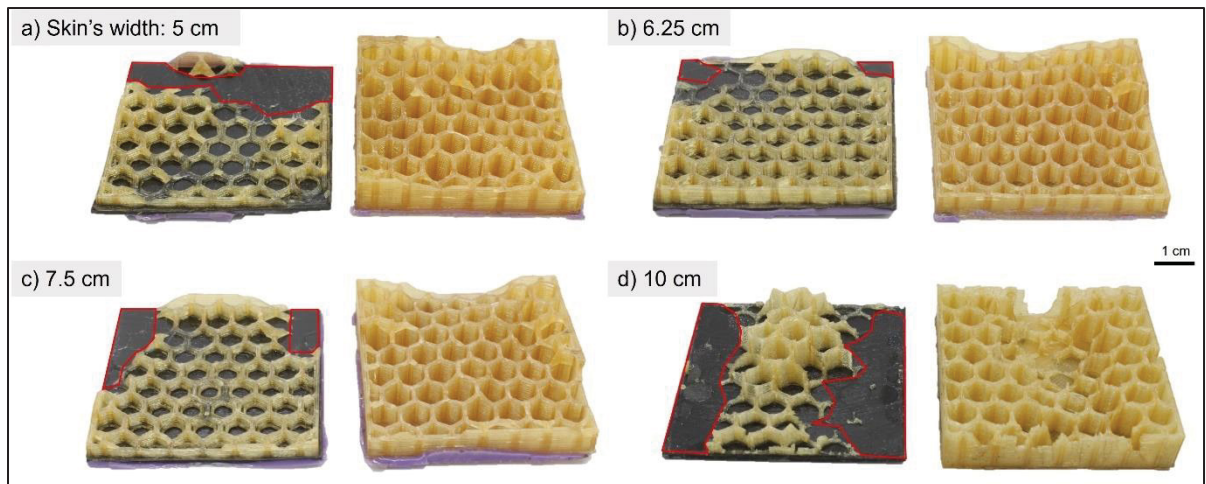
Fractured induction welded sandwich samples. The samples were welded using a skin's width of (a) 5 cm, (b) 6.25 cm, (c) 7.5 cm, (d) 10 cm. The red lines correspond to the surface areas where adhesive failure occurred
